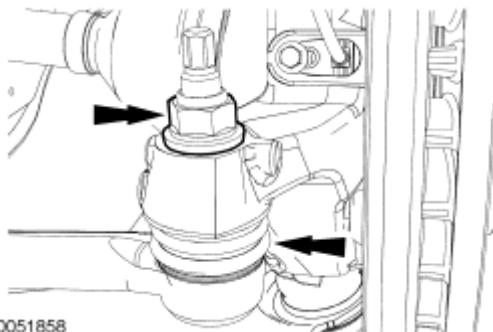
Identifying Tie-Rod End Nut And Wheel Knuckles
